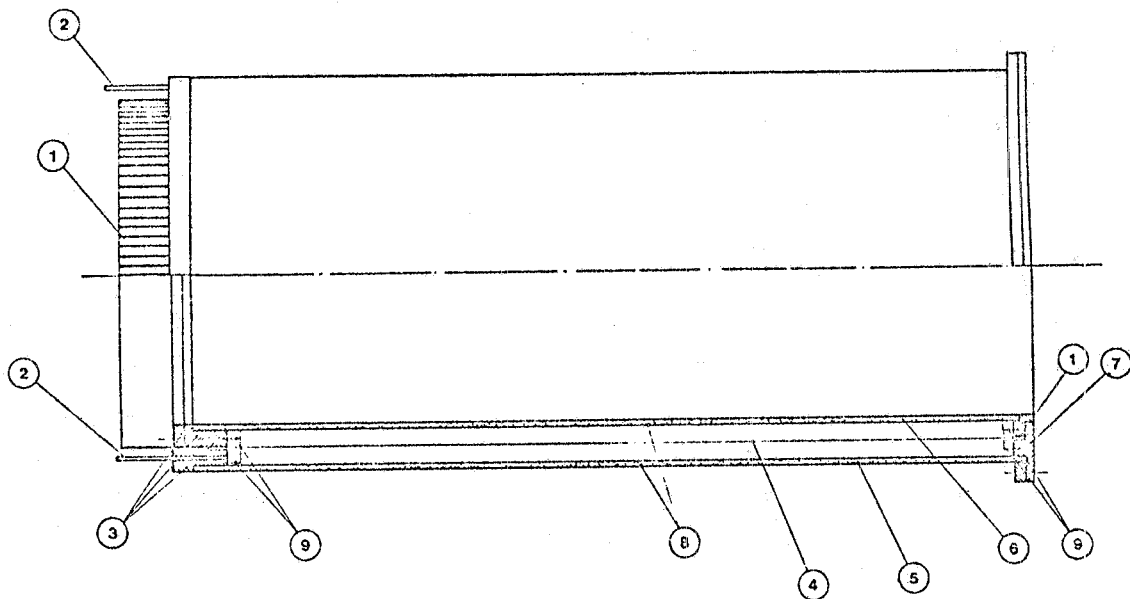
Longitudinal cross section of cylindrical chamber prototype:
